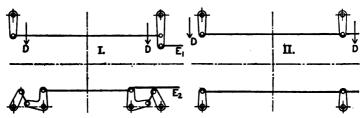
Gears without the Wrist-plate: I. Brown-Corliss; II. Lane and Bodley.
